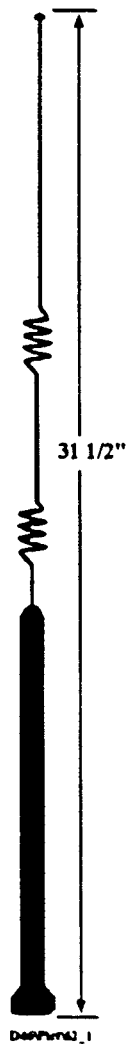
46-0062-001 Antenna dimensions (For Reference Only)
